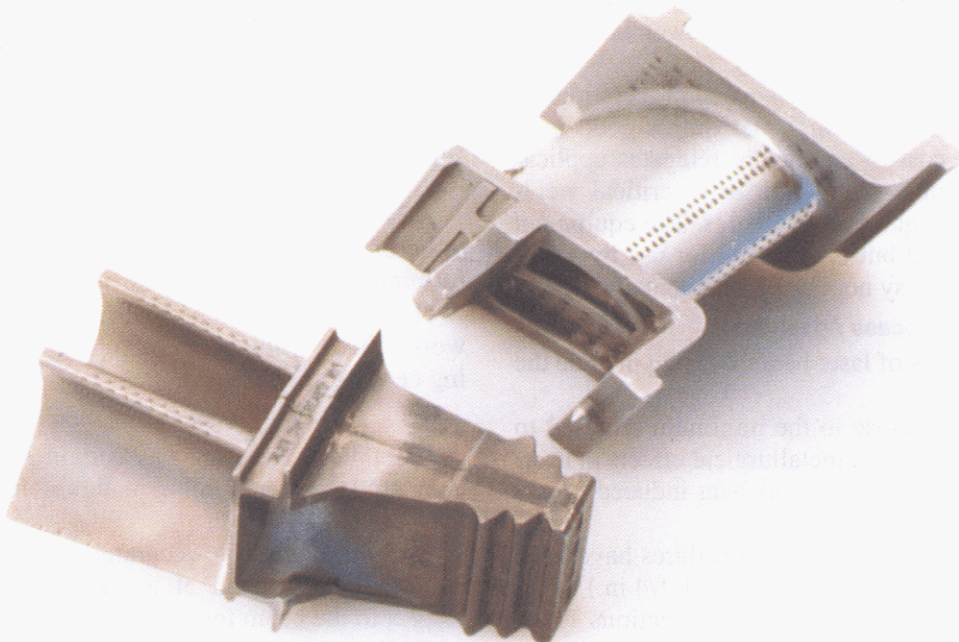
Jet Engine Turbine Blade Showing Laser Drilled Holes
